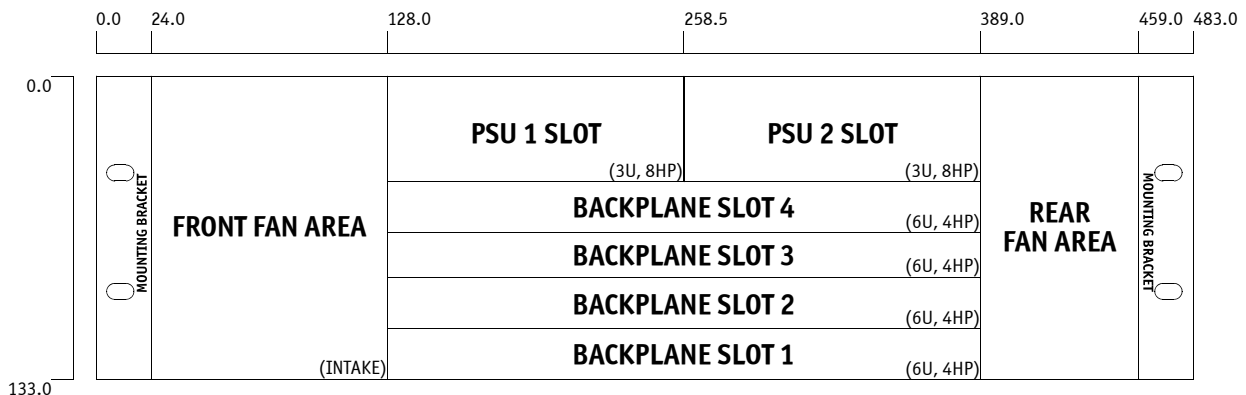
CP-RAPID3 Chassis View with Dimension (Top)
